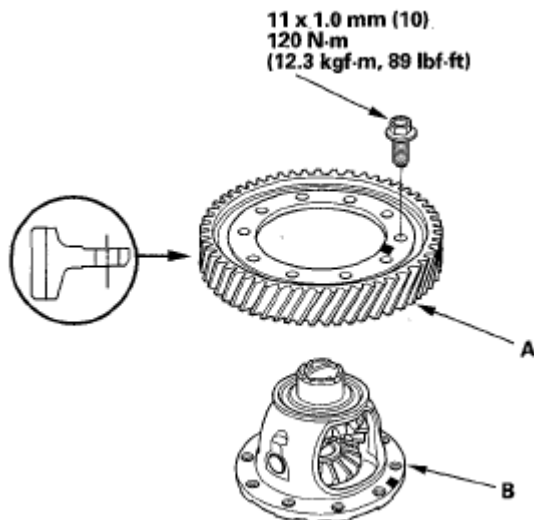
Identifying Final Driven Gear And Differential Carrier With Torque Specification
